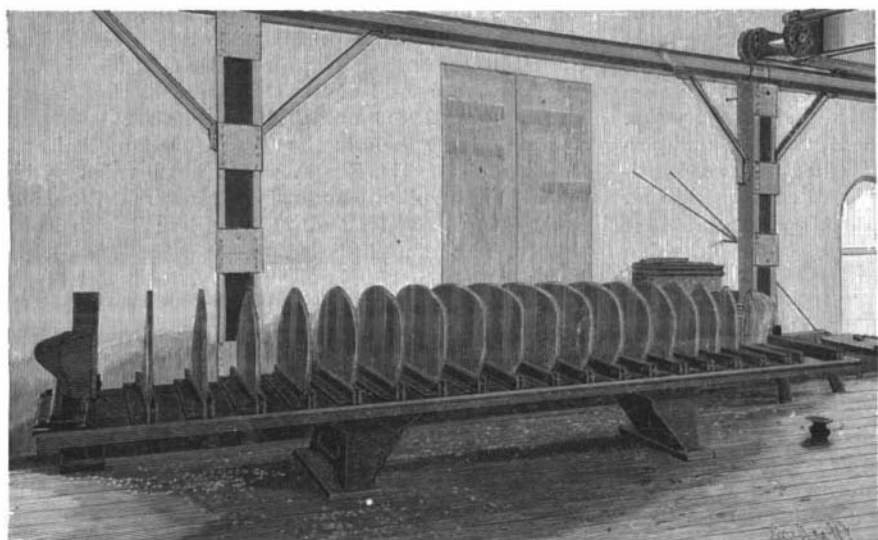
Board Sections for Making "Former" Model, on Erecting Table.
